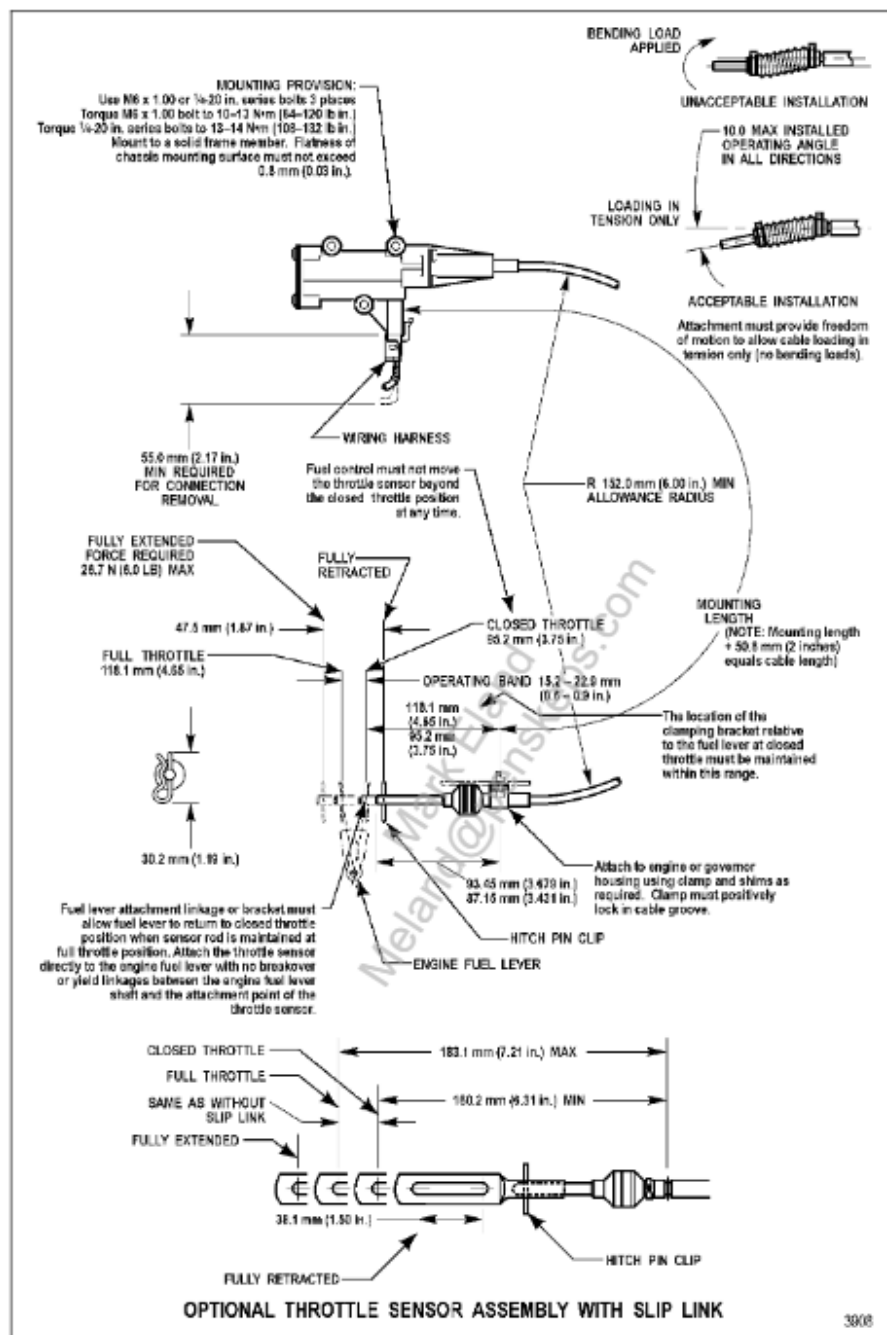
Hitch-Pin Throttle Position Sensor Installation Diagram
